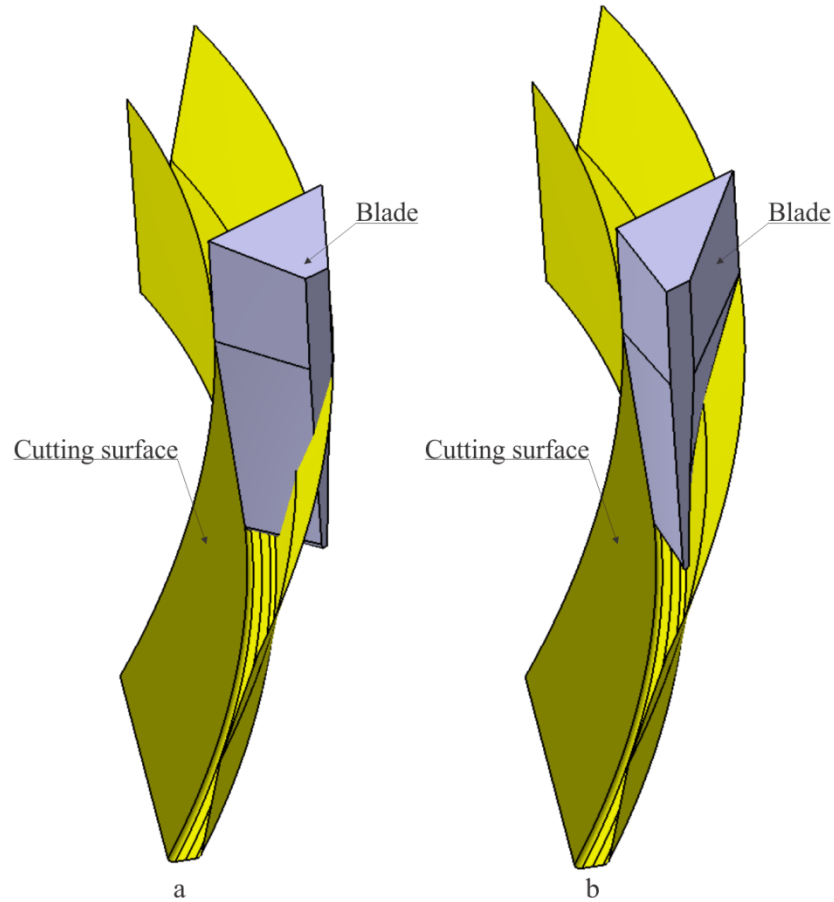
Gouging between the blade and the cutting surface, a) gouging accrued, b) gouging avoided.
